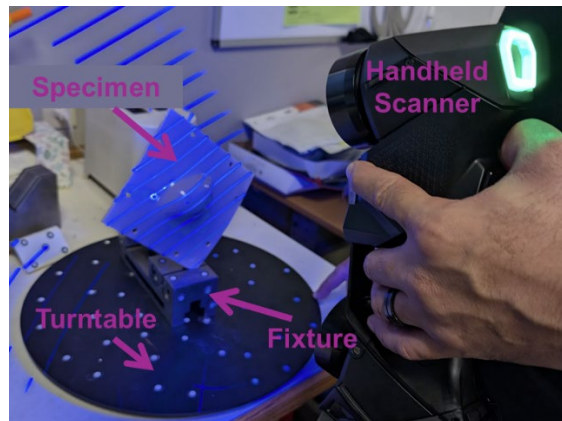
Handheld scanner experimental setup with scanning targets on the turntable and fixture.
